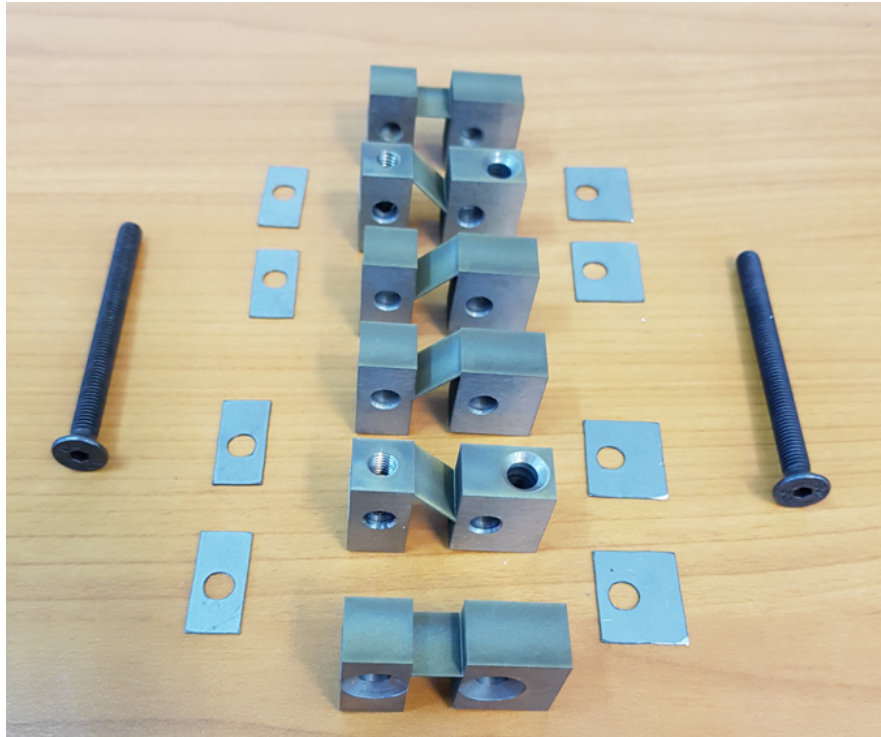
Cross and straight flexure assembly parts before assembly.
